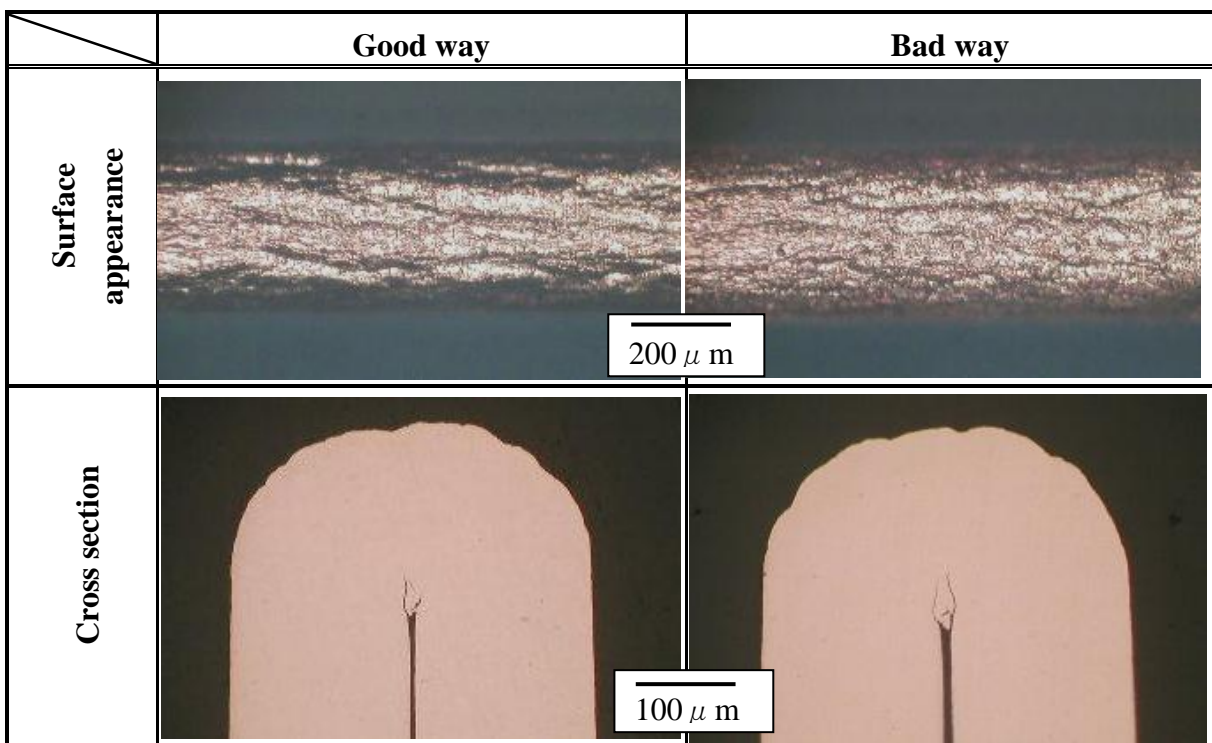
Surface appearances and cross sections of U-shaped bending test specimens.
